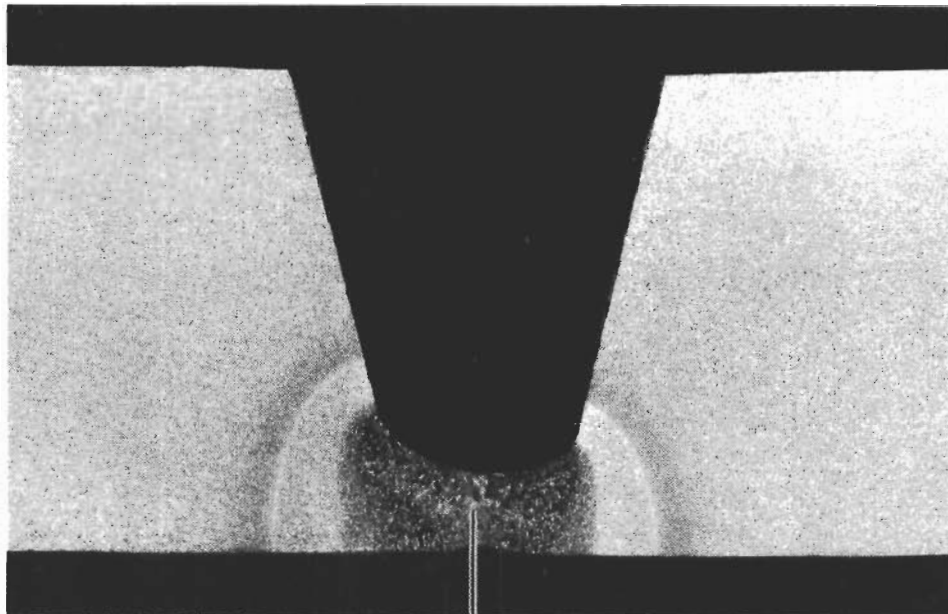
Typical Dendrite Segregation Found in Weld-Fusion-Zones of Weldments in 18% Nickel Maraging Steel Plate
